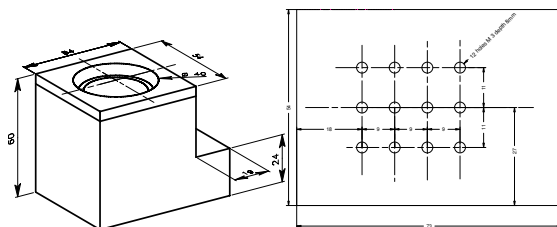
Technical drawing of the package and mounting holes of the 30mm 19-channel PDM
